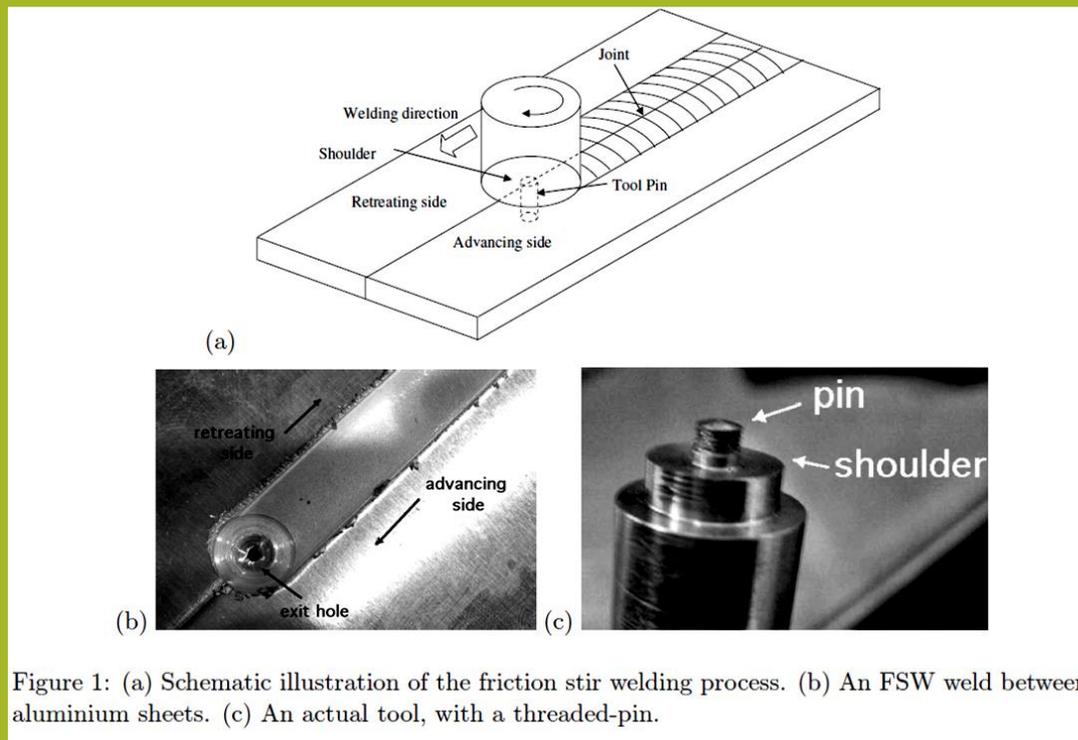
(a) Schematic illustration of the friction stir welding process. (b) An FSW weld between aluminium sheets. (c) An actual tool, with a threaded-pin.
